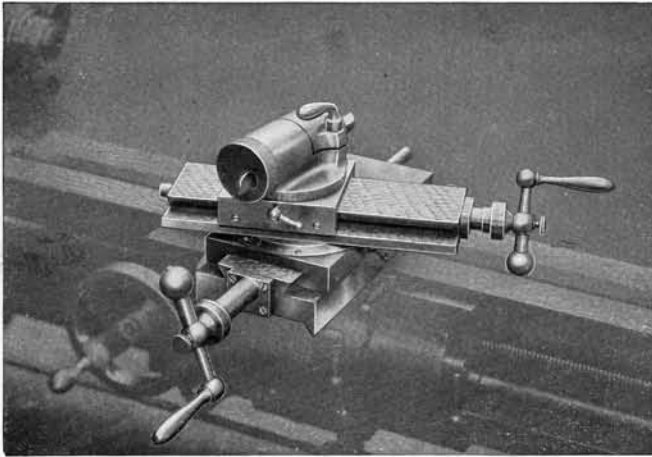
Compound Slide Rest with Rivett Eccentric Tool Holder, on 608 lathe carriage
